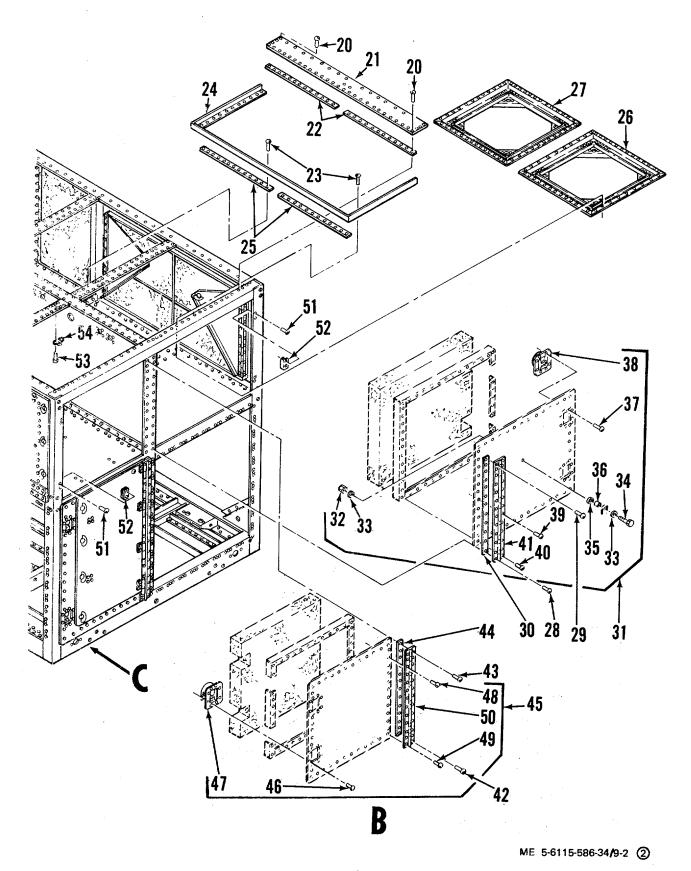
Shell assembly, exploded view. (sheet 2 of 9)
